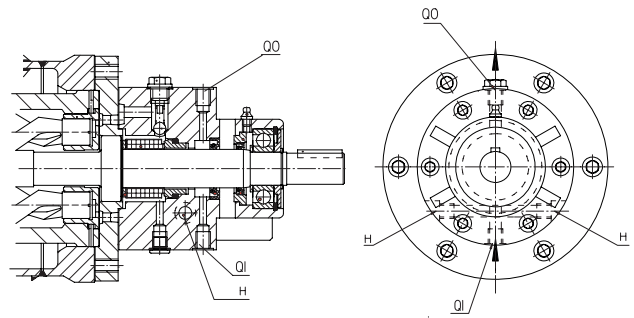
SN..ER..LB..QW, external antifriction bearing, capable of relubrication; cooled, heated shaft seal, quench (shaft seal ring)
